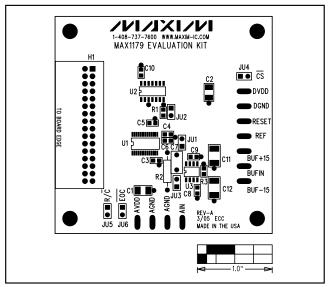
MAX1179 EV Kit Component Placement Guide—Component Side
